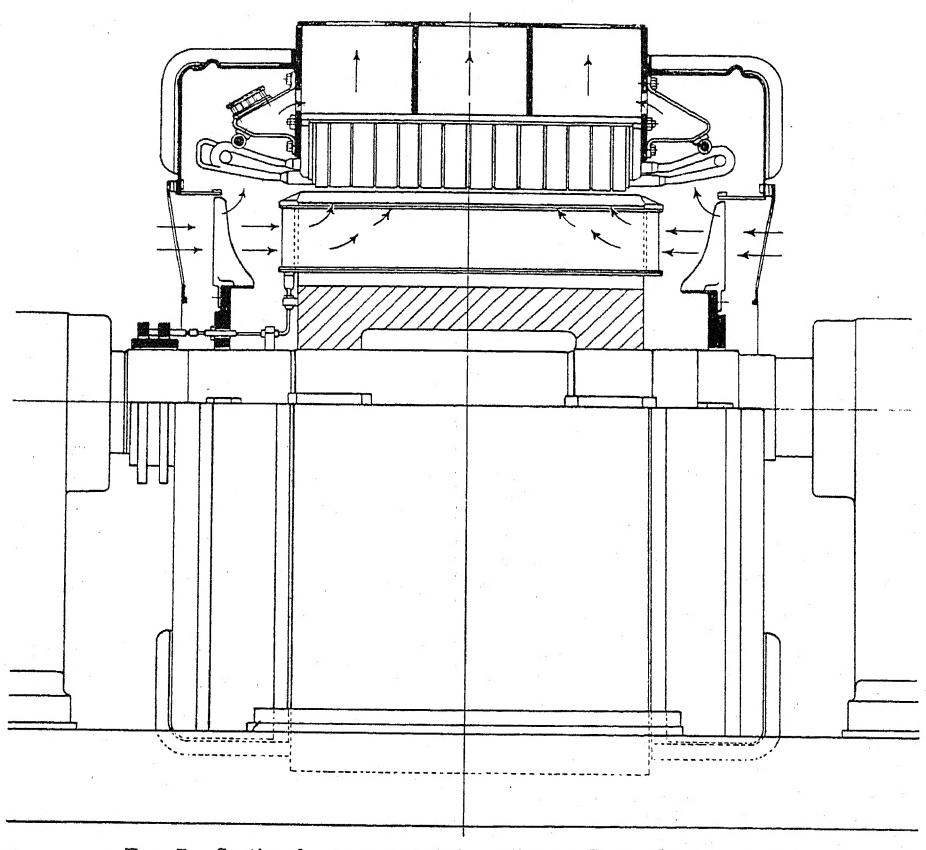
Sectional arrangement of a salient-pole synchronous motor.
